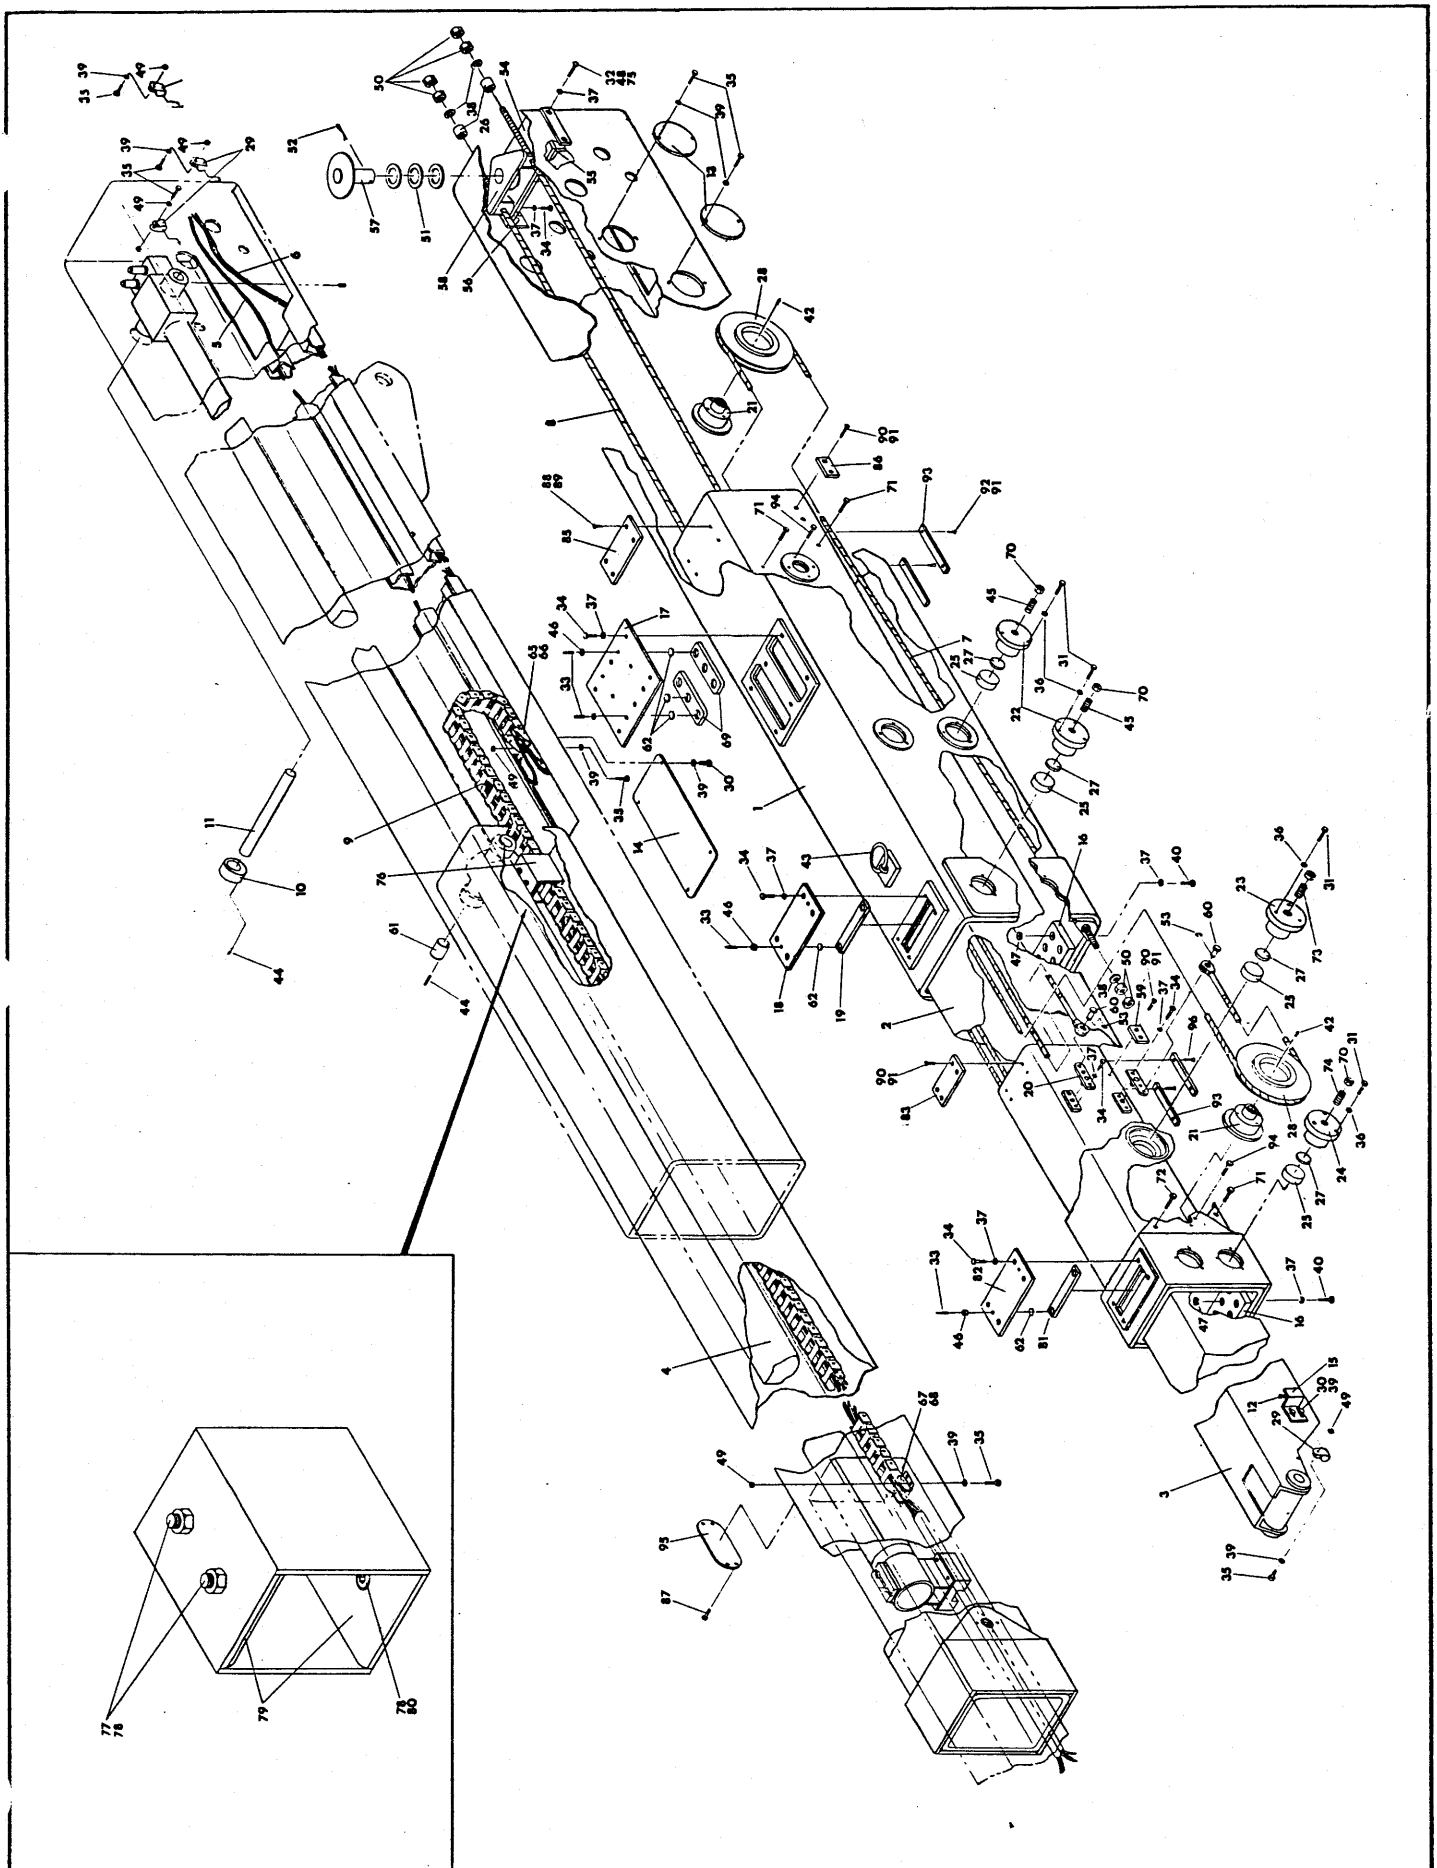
BOOM ASSEMBLY (58,68) Beginning with Serial # 4934
